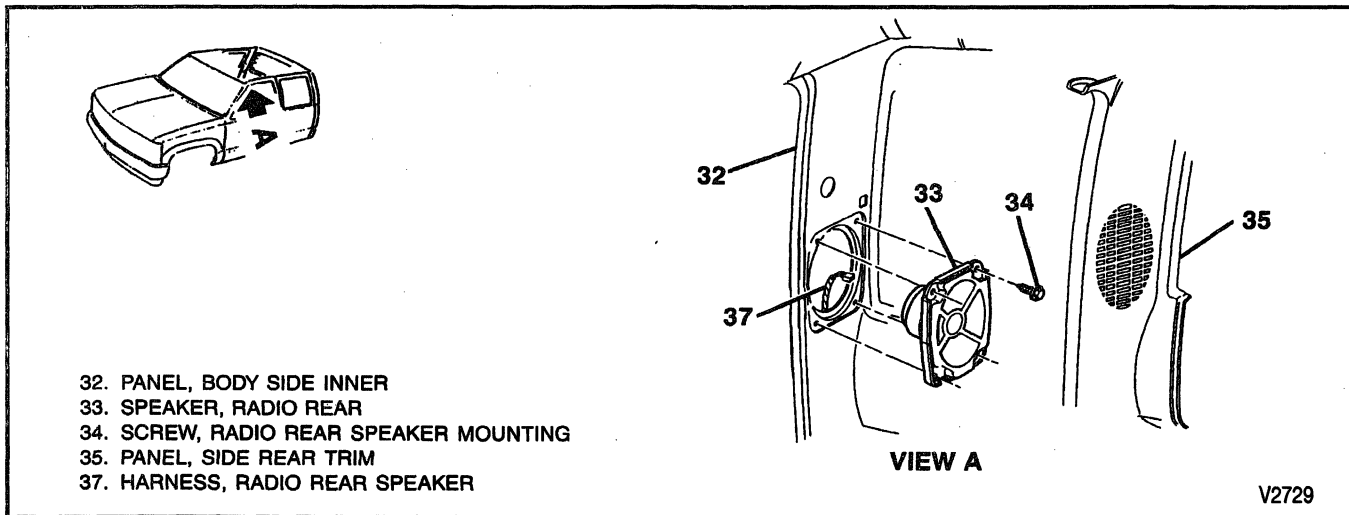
Rear Speaker Assembly (Extended Cab/Crew Cab Models)
